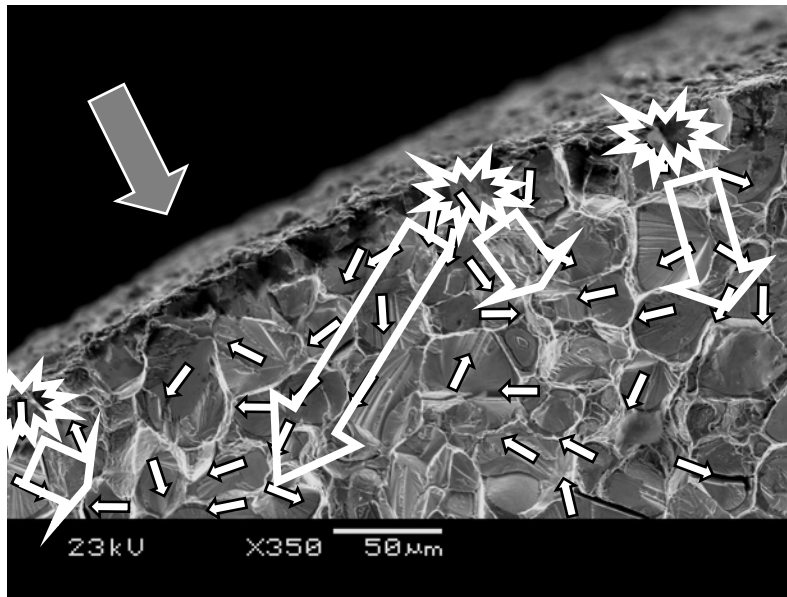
Tensile Fracture Surface of EDM WNiFe Drop Tower Specimen Near Fracture Initiation
